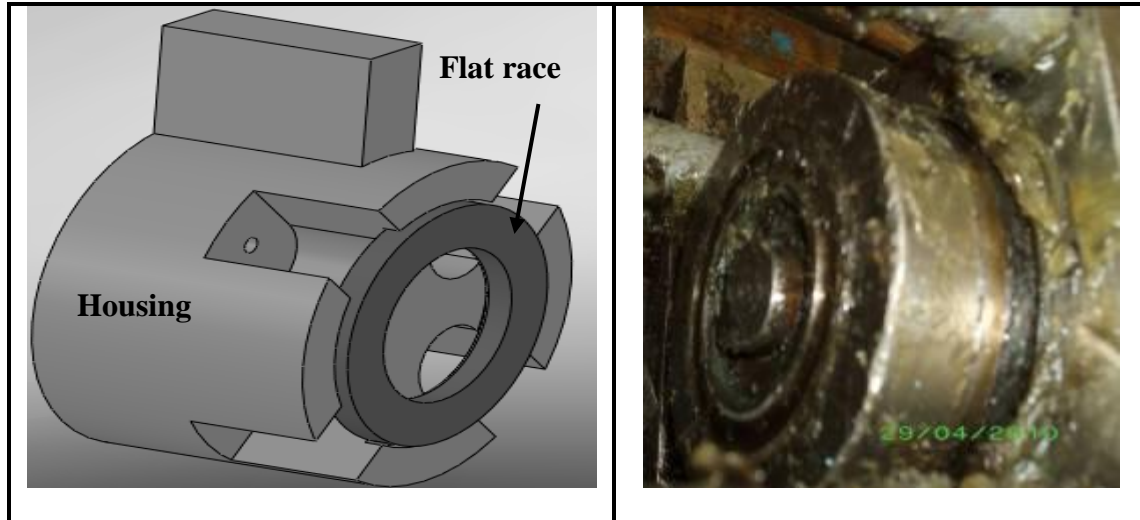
Left) the housing and fitted flat race Right) Rotating disk
